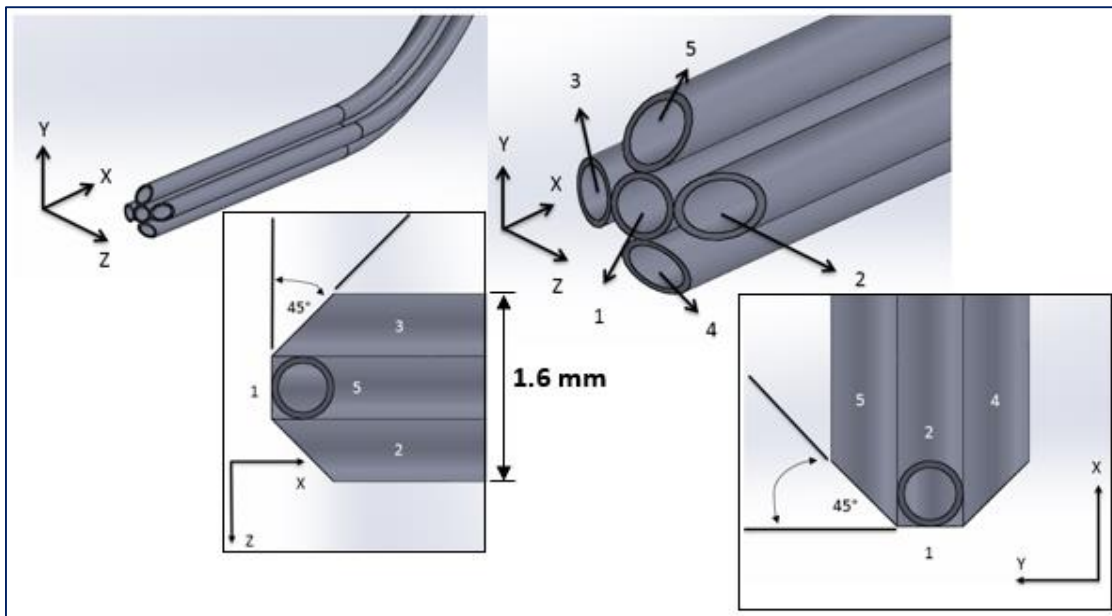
FIVE-HOLE PROBE GEOMETRY AND ARRANGEMENT.
